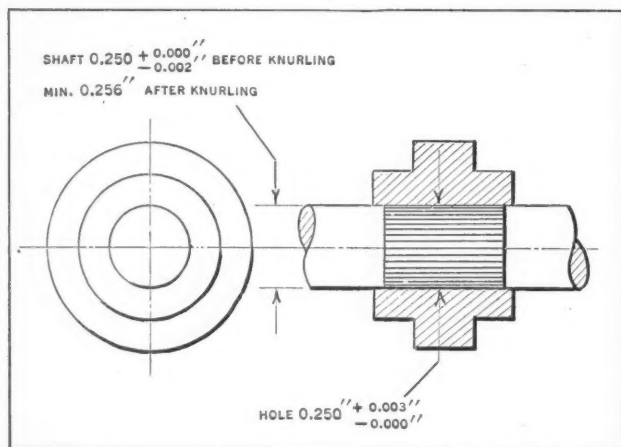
Brass Collar Pressed on Knurled Section of a Steel Shaft
